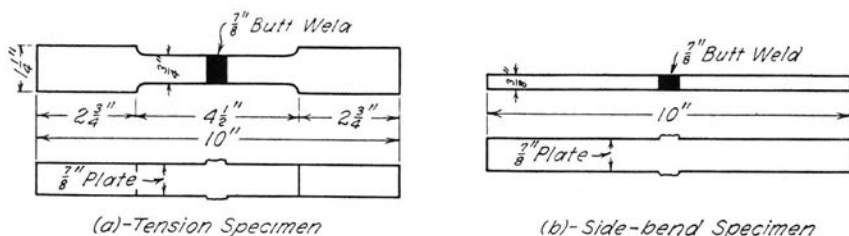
SPECIMENS FOR TENSION AND SIDE-BEND TESTS OF WELDS
